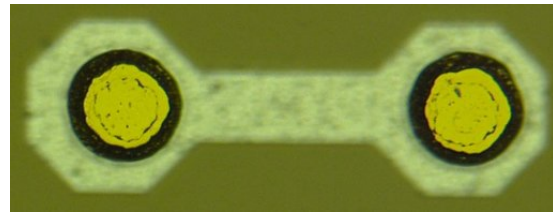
Gold stud bump with flat top ready for solder bump placement.
